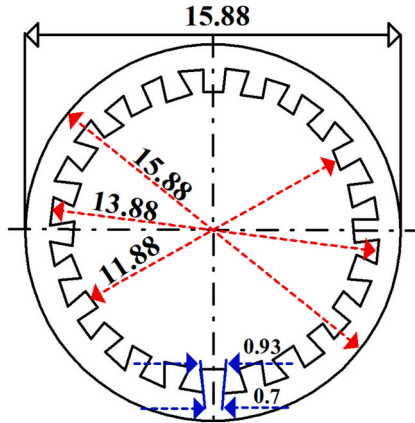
Cross-sectional dimensions of a heat pipe with grooves.
